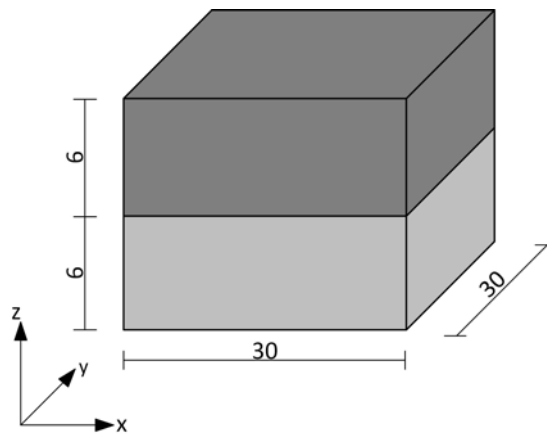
Dimensions small-scale test specimen in millimetres.
